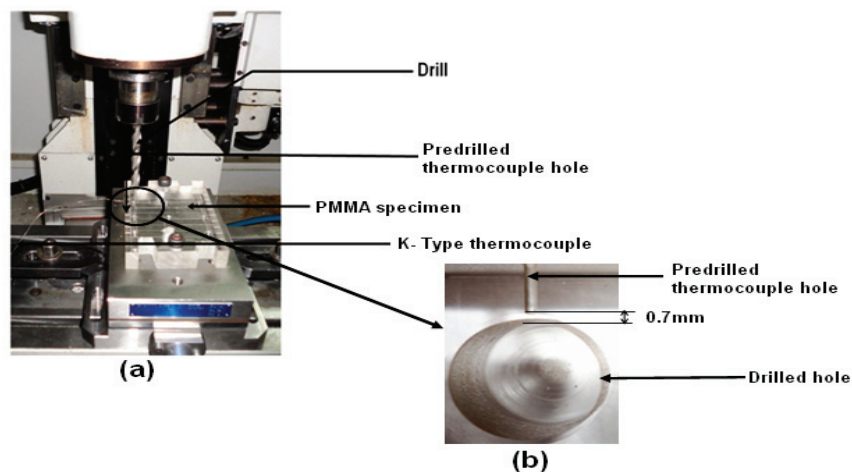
Experimental set up (a) and enlarged view of the predrilled thermocouple hole and drilled hole (b)
